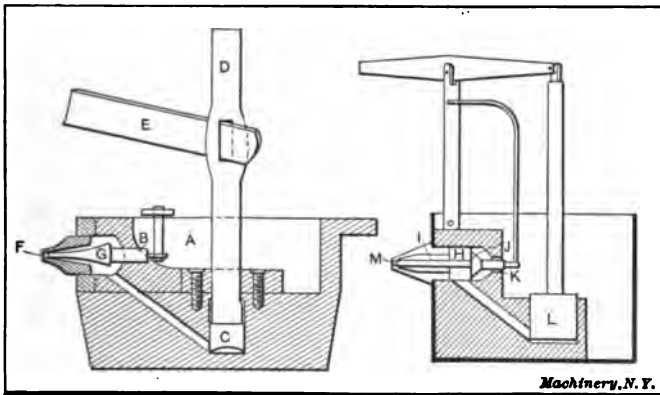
Type-casting Machine built in 1849. Fig. 2. Improvement in the Type-casting Machine, made in 1856
